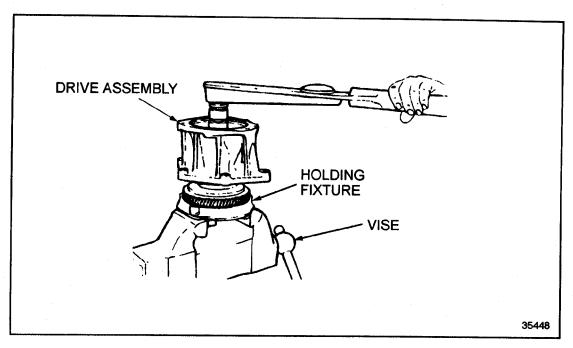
Air Compressor Drive Shaft Installation (Former Design)
